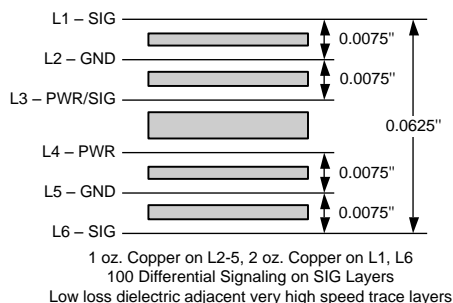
Recommended PCB Layer Stack-Up for a 6-Layer Board
